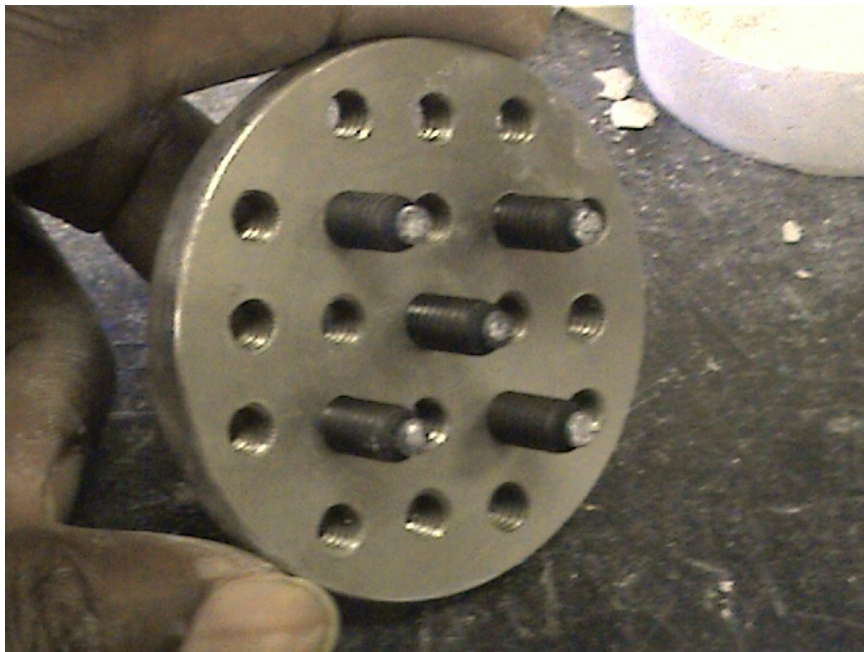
Load Assembly showing "5" Flat Head Shear Stud Arrangement.
